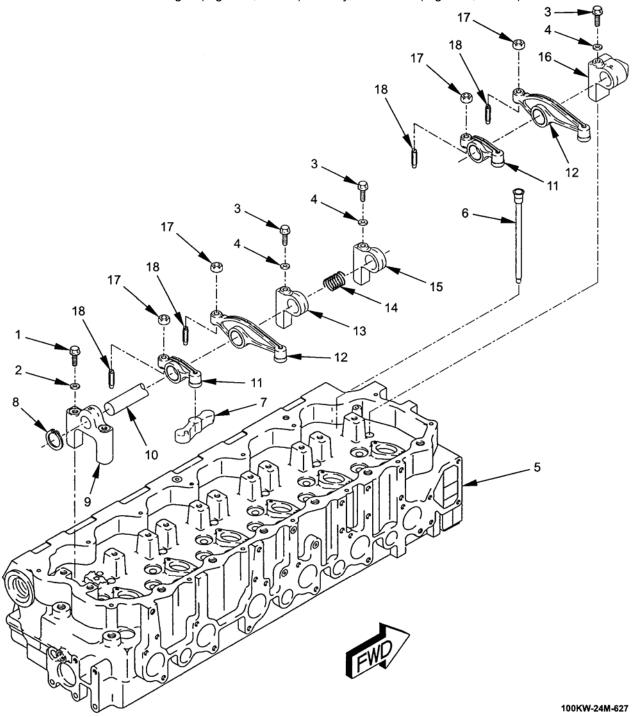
Rocker Shaft and Pushrods Removal and Installation.
